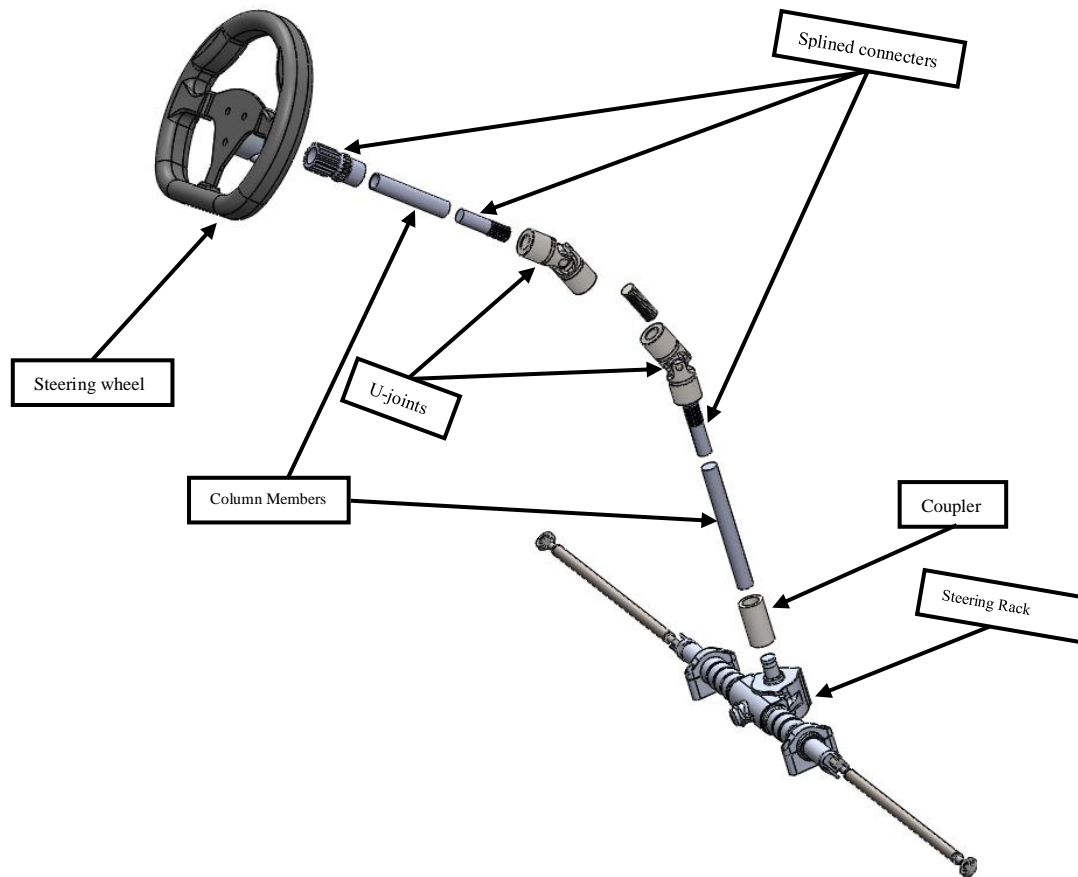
Full exploded view of the 2022 FSAE Steering system I designed
